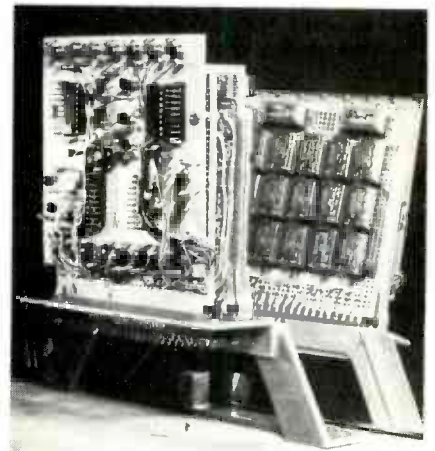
THE RELAY-DRIVER BOARD is mounted parallel to the relay board, seen reflected in the mirror.
